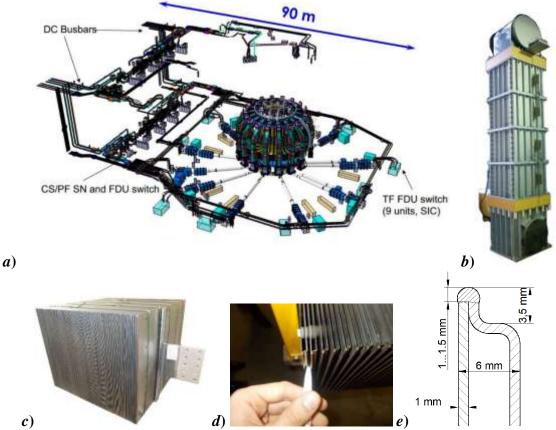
a*) layout of ITER switching equipment, *b*) resistor module PF, *c*) resistive element PF, *d*) welds of the resistive element PF, *e*) the design of the weld
